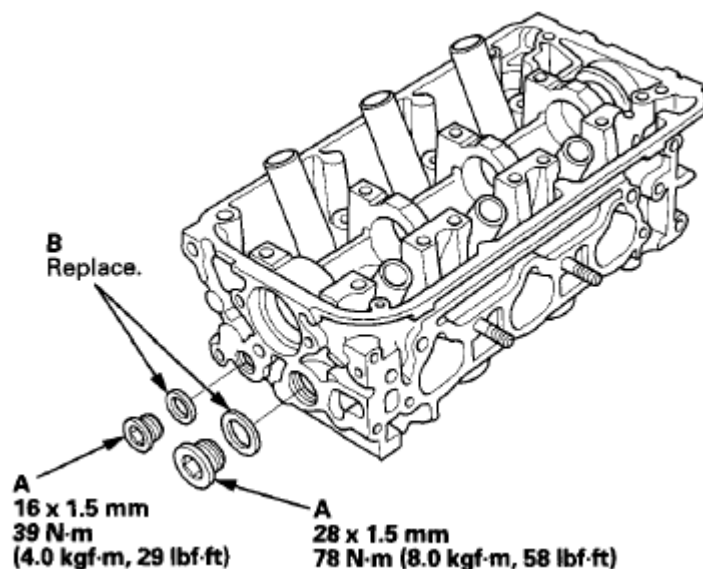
Identifying Sealing Bolts - Rear With Torque Specifications
